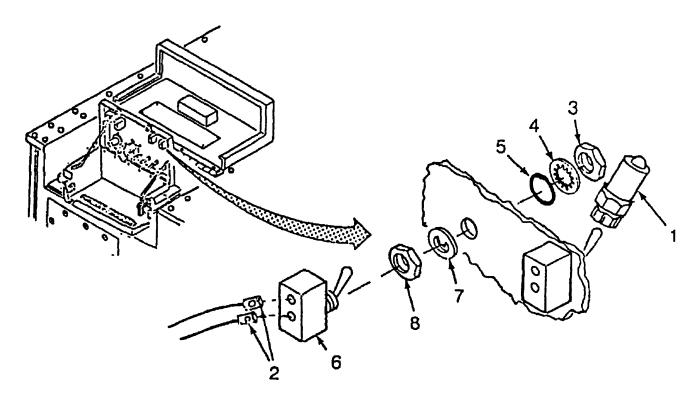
Control Box Disassembly Purge and Flame Reset Switches
